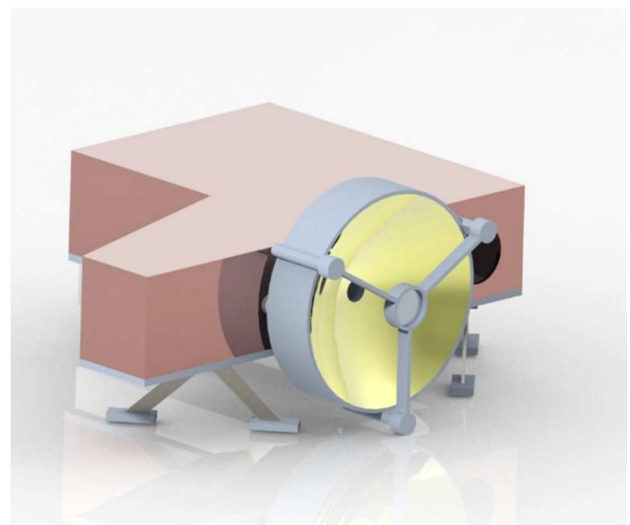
CAD model of the MiLi assembly – feasibility CDF study.
